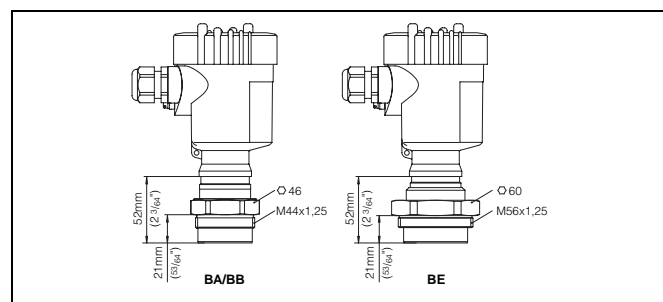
VEGABAR 64, threaded fitting for the paper industry: BA/BB = M44x1.25; BE = M 56x1.25
